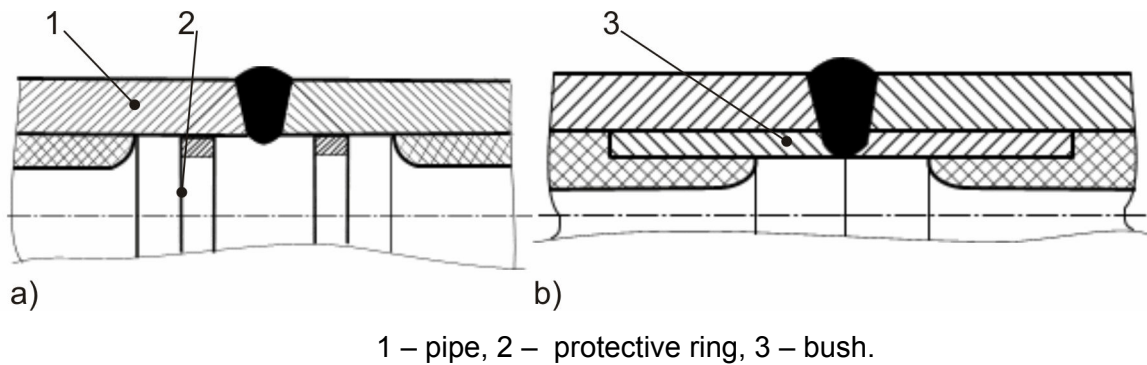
Zone of a pipeline's weld butt with corrosion protection by protectors (a) and with bushes from stainless steel (b).
